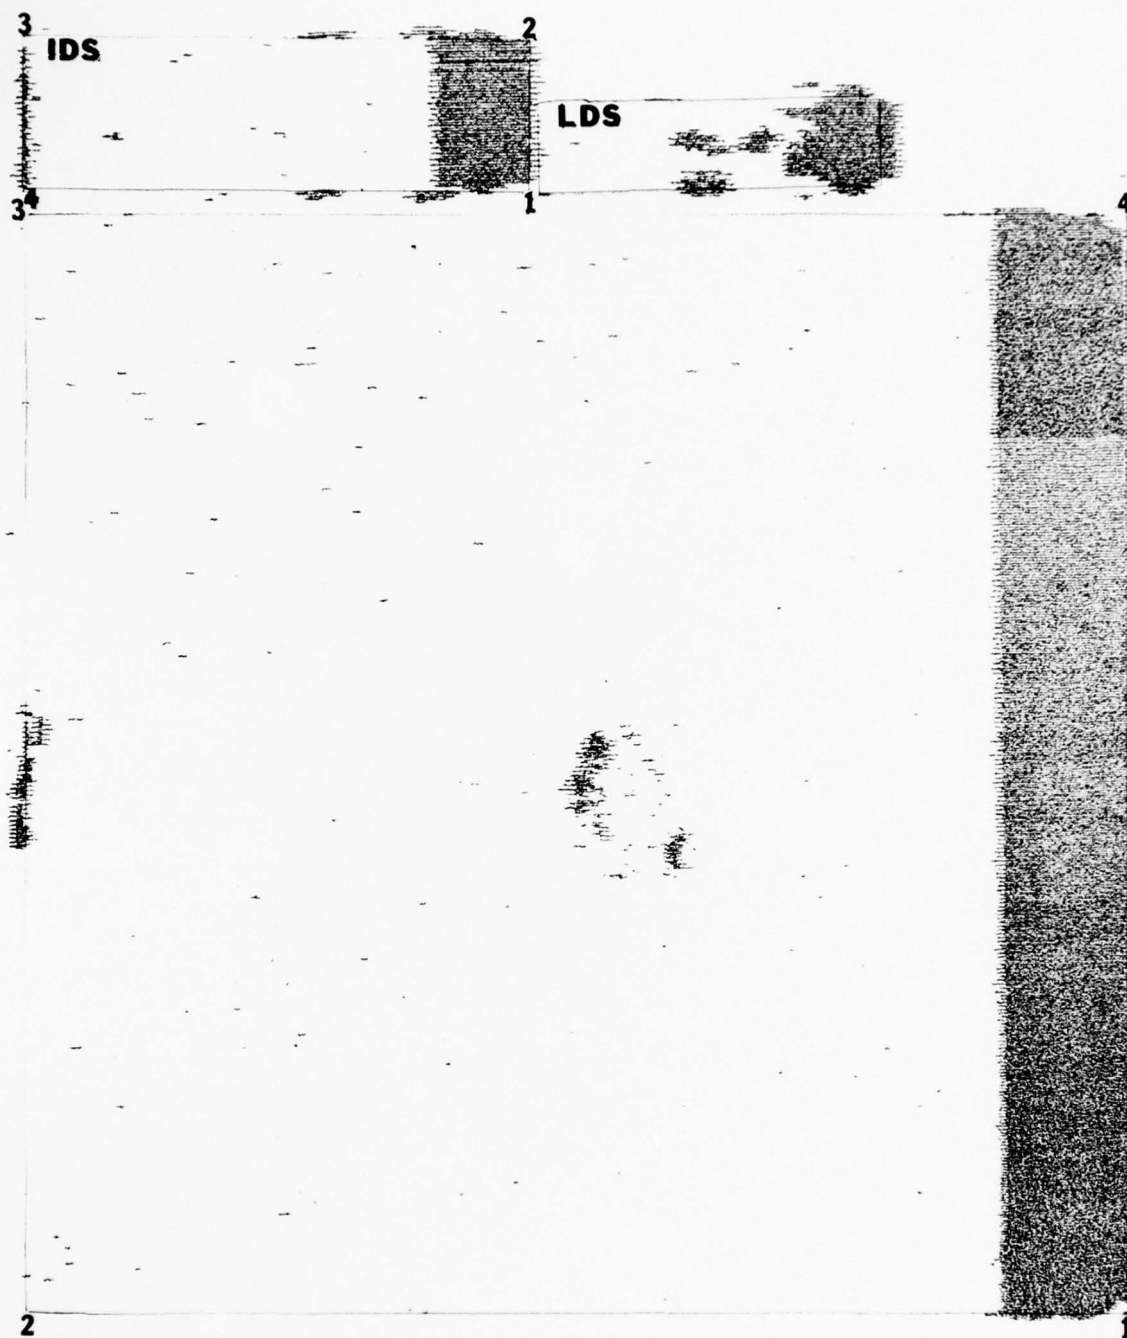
C-scan Recording of 45 MHz, 11° Shear Wave Inspection of NC-203A After Machining with Surface Porosity Up.
